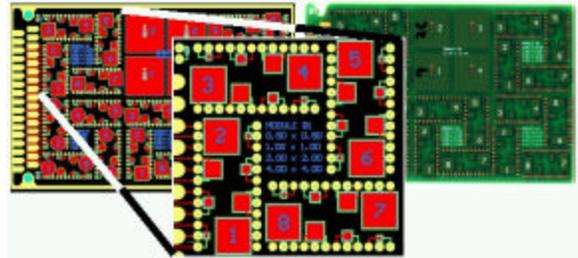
Layout Drawings and Photo of CapTV-1 Design
